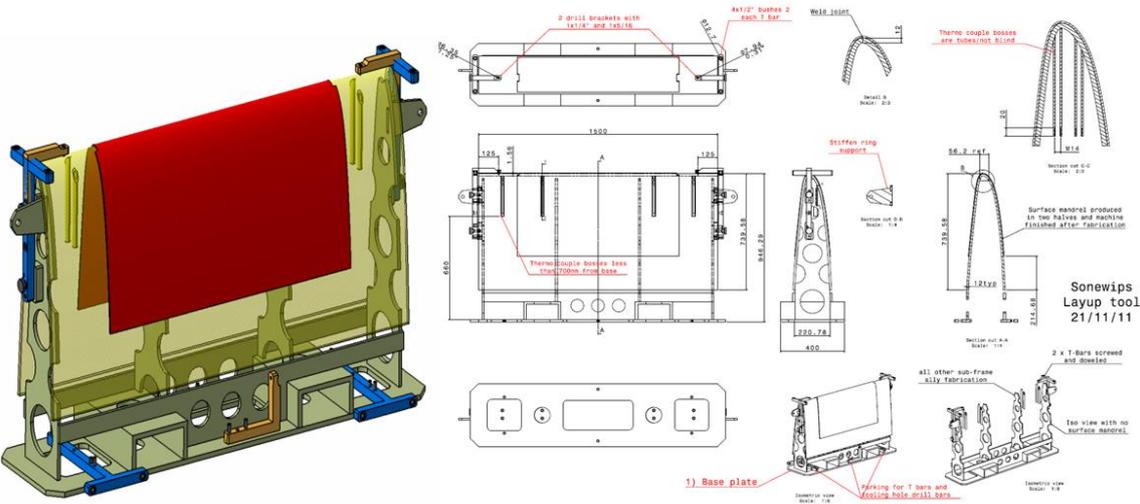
Views of the layup tool used to manufacture the leading edge test model heating skin
